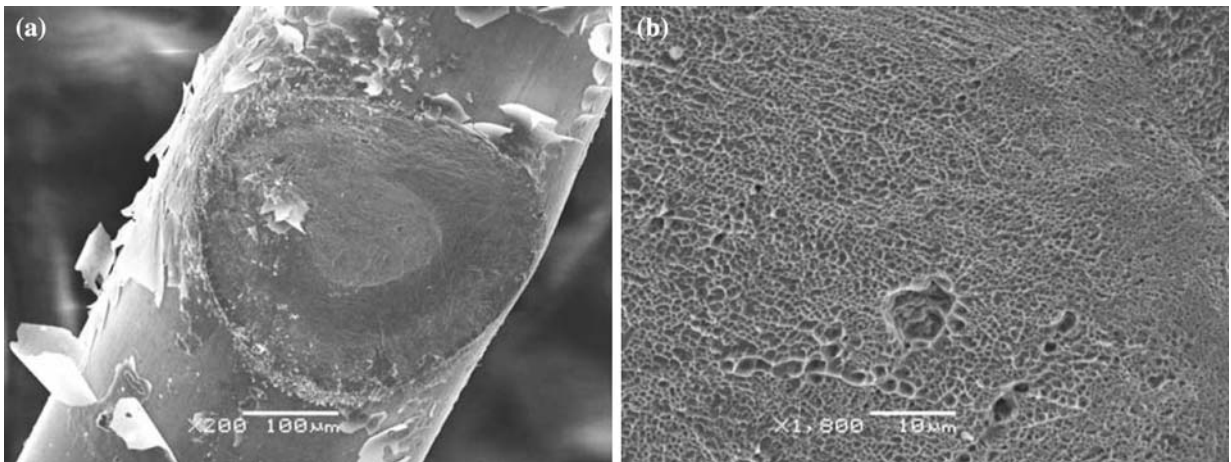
Fracture surfaces for weld made using 100 A and 1.5 kg-f weld force.
